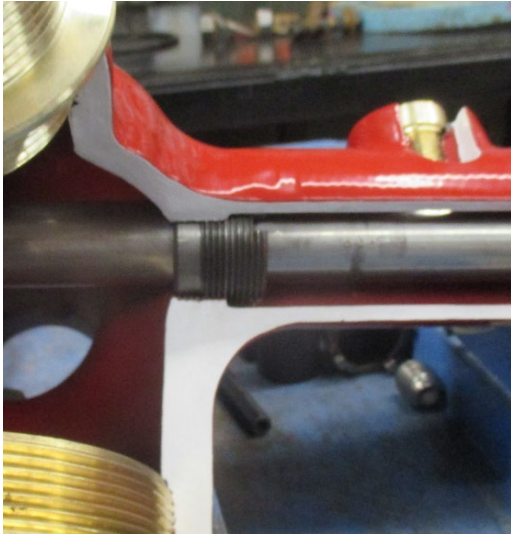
Check the O-rings at this bushing and at the bottom of the upper barrel
